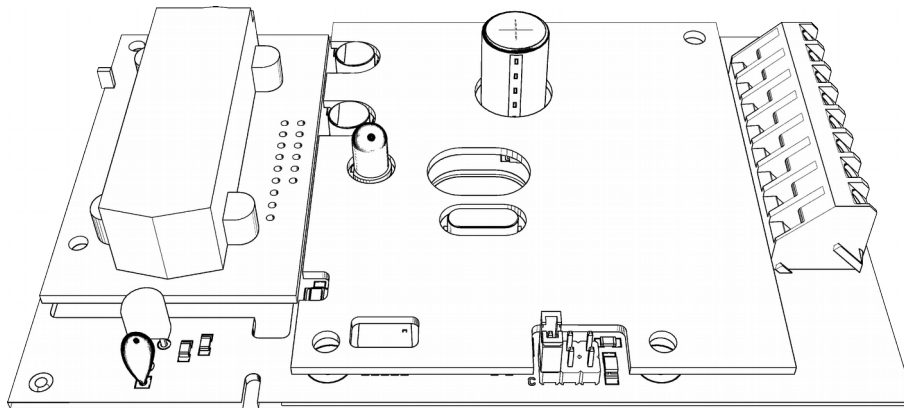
View of printed circuit in the wall-mounted version of the transmitter.
